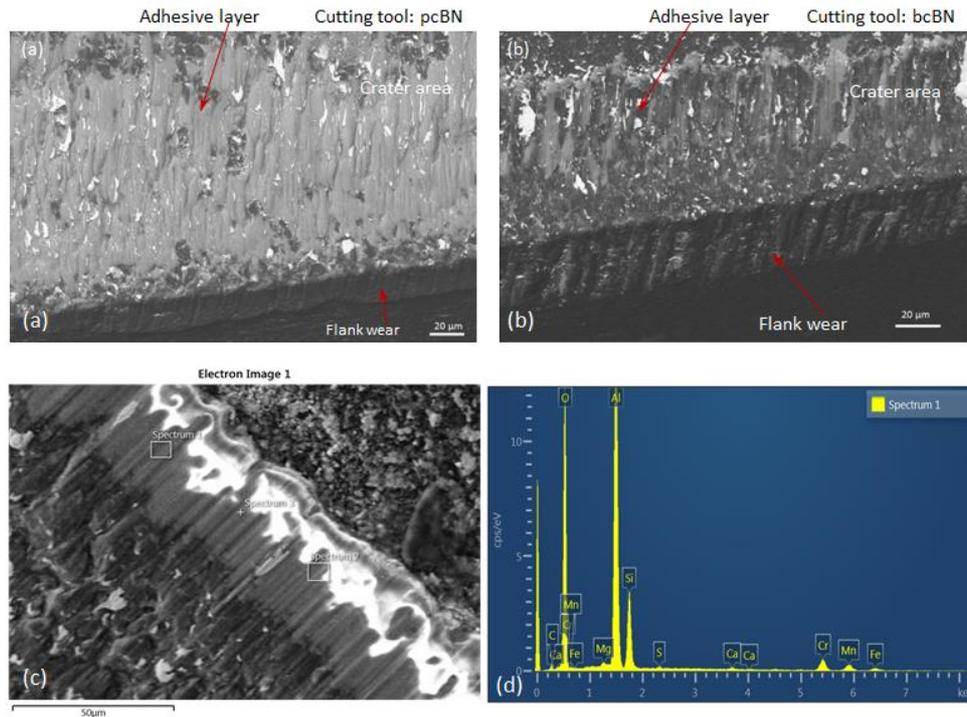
Adhesion layer generated on pcBN tool (a) and bcBN tool (b) during machining high Cr white casting iron; EDX analysis of adhesion layer on tool wear region (a) and (d).
